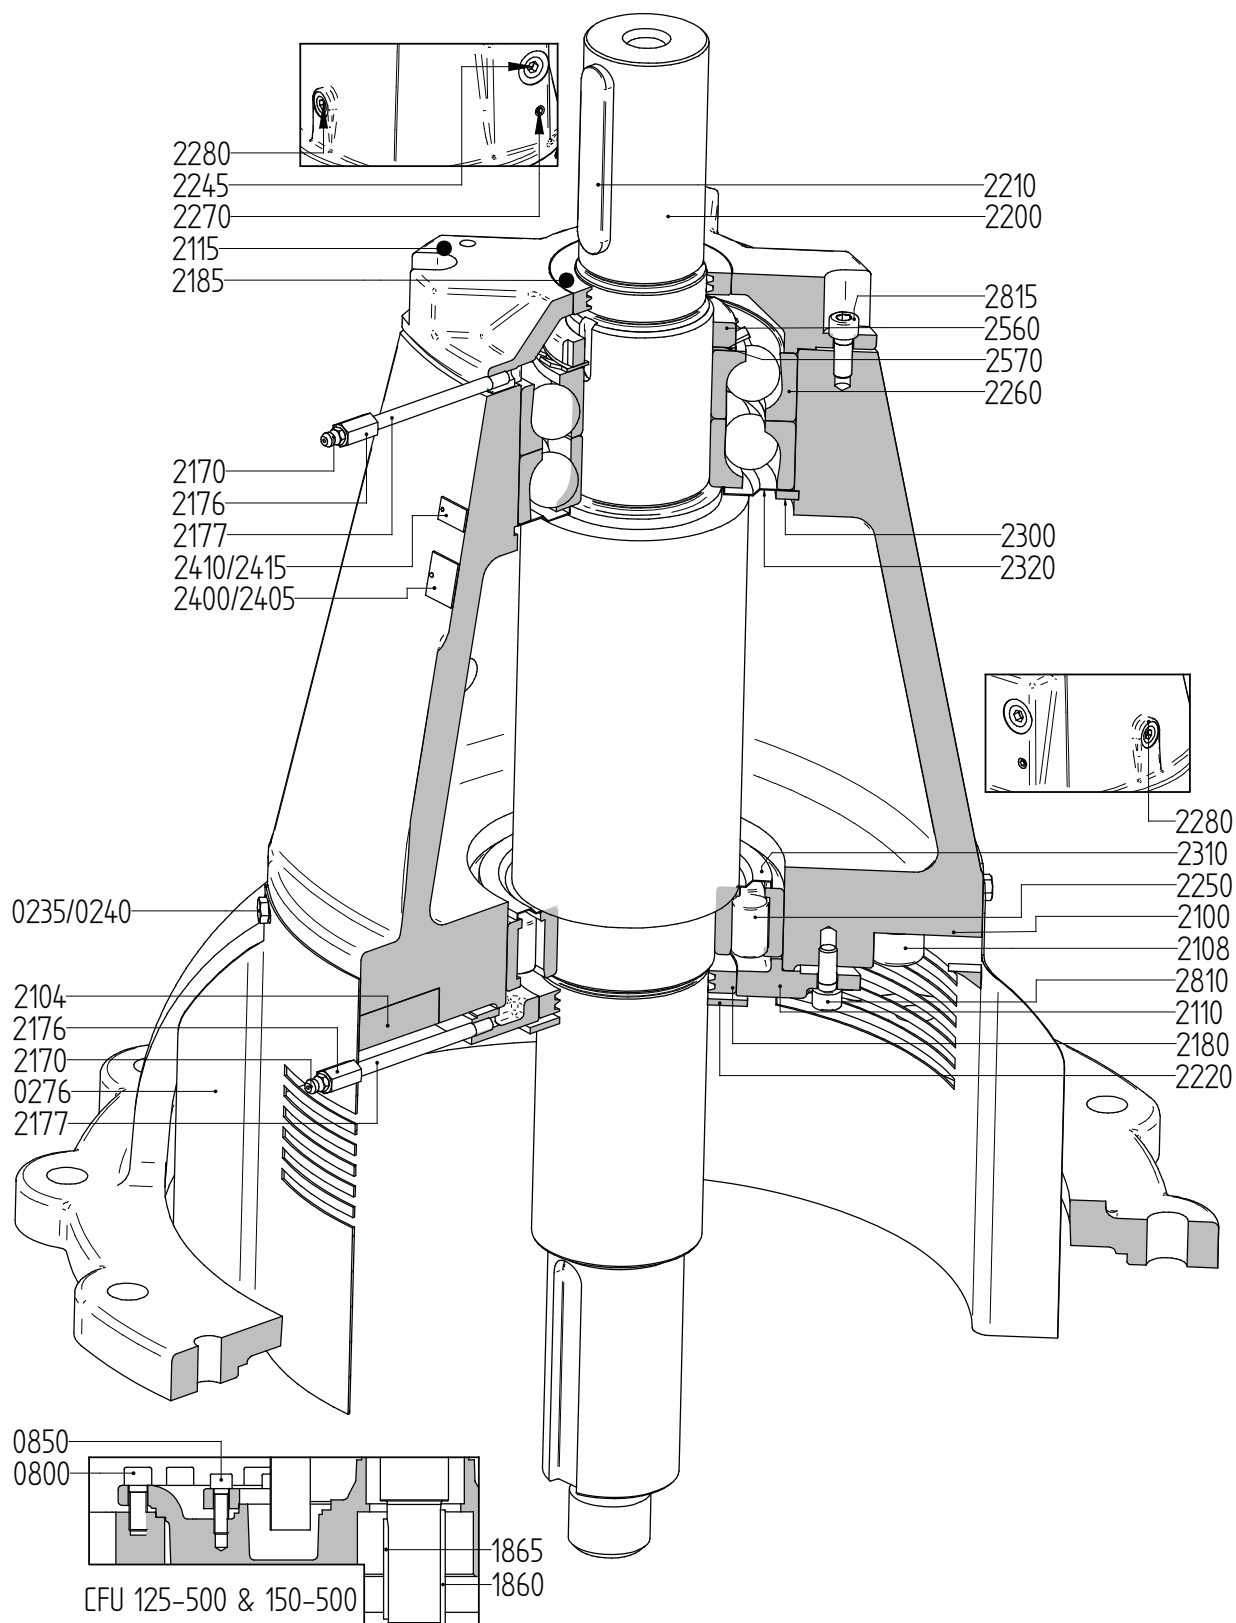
Sectional drawing bearing bracket, bearing group 4.
